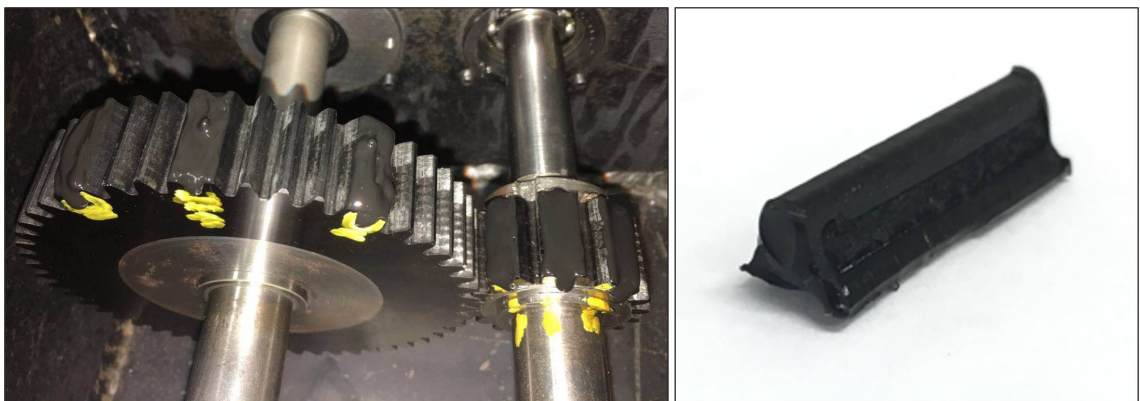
Curing moulds on gear teeth in the dry test (left) and a cured gear tooth mould (right).
